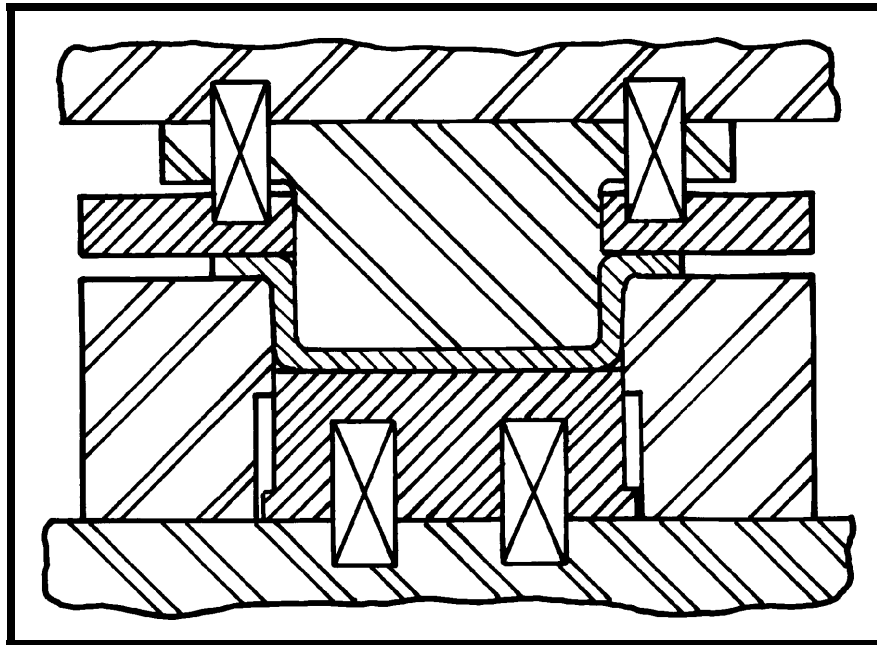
Sectional view of a typical bending or forming die illustrating forming stock of the correct thickness. *Smith & Associates
